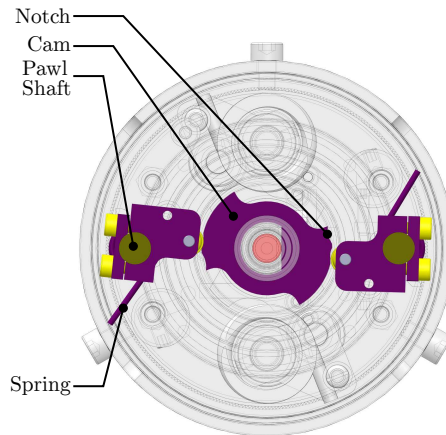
Threshold cam in cross-sectional view of CAD-model.
